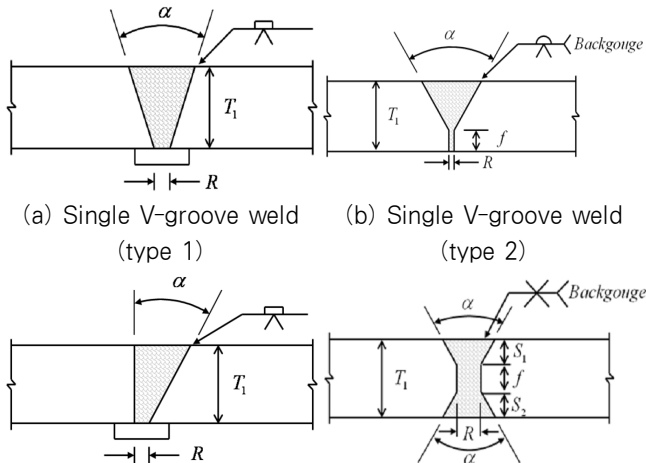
Examples of AWS-prequalified CJP weld details
